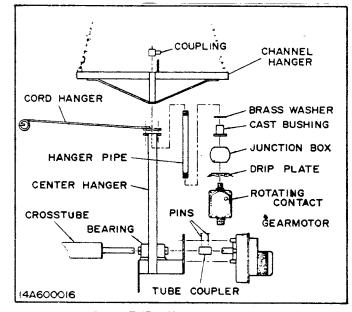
CENTER HANGER ASSEMBLY (See page 30 for additional information)
